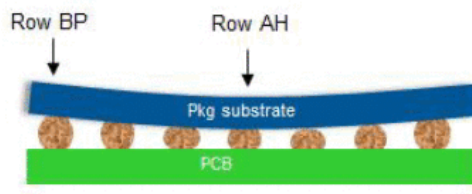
BGA warpage defect during the reflow soldering process [1].
